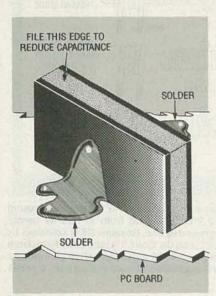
TO MAKE C10, take a small square of G-10, 0.062-inch PC board material and trim it to a %-inch square. Install it on the solder side of the board in the location shown in Fig. 6.
